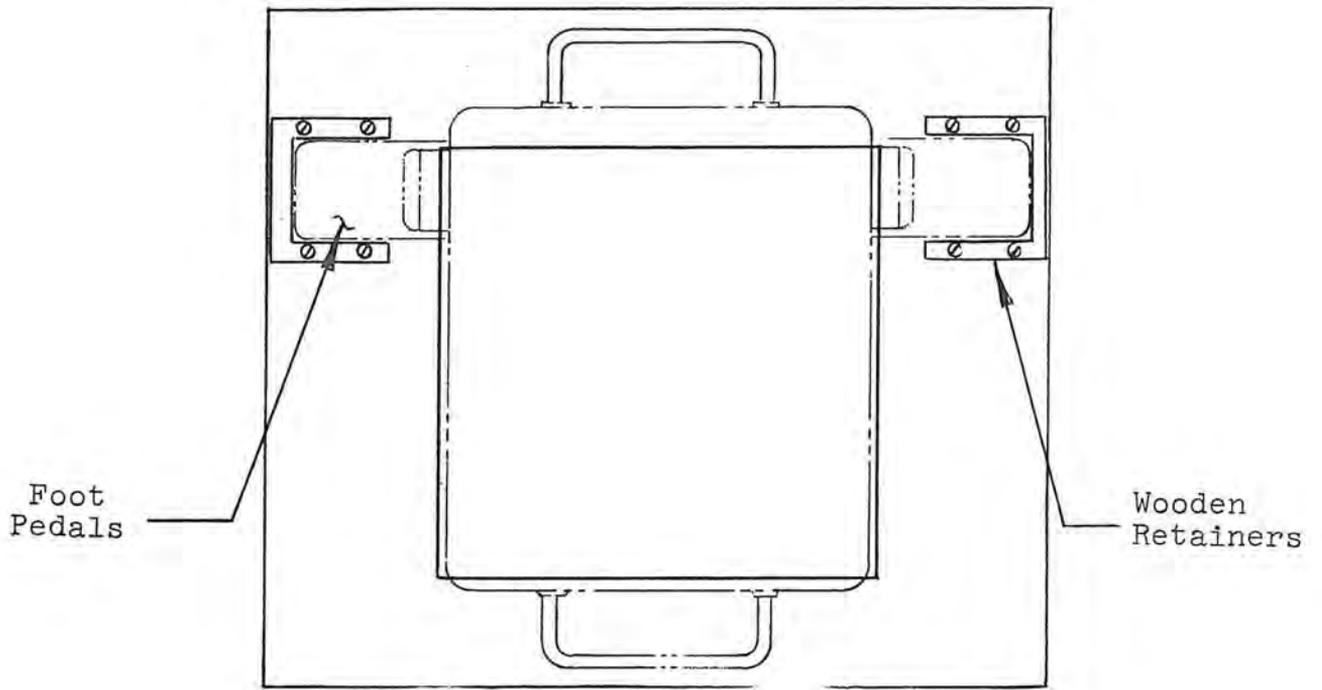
Suggested torque restraining test fixture for bench-top laboratory testing with UFTM.
